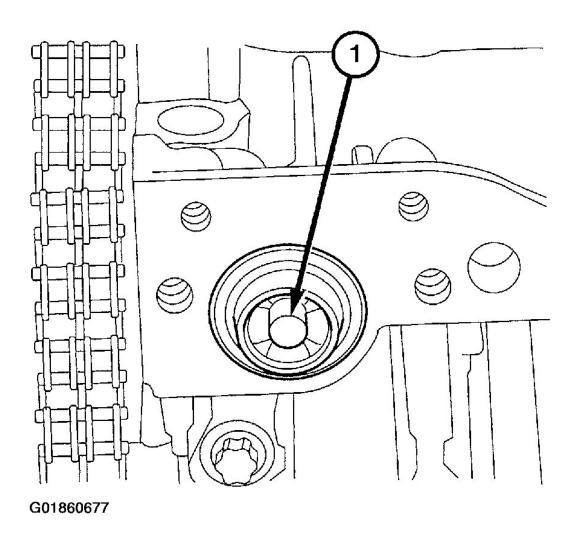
Releasing Oil Pump Chain Tensioner & Removing Oil Pump Courtesy of DAIMLERCHRYSLER CORP.
